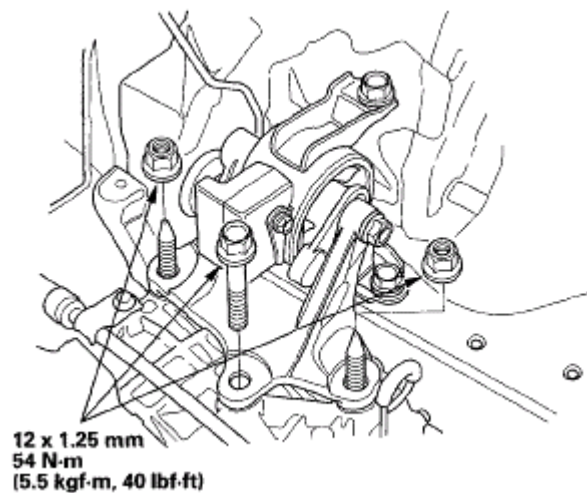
Identifying Transmission Mount Bracket Support Bolt And Nuts - A/T Model
